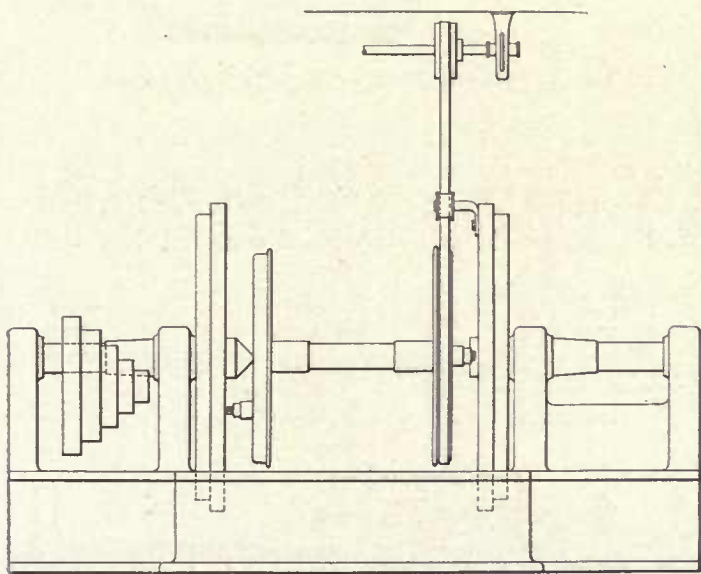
Attachment on Wheel Lathe for Turning Driving Journals.
